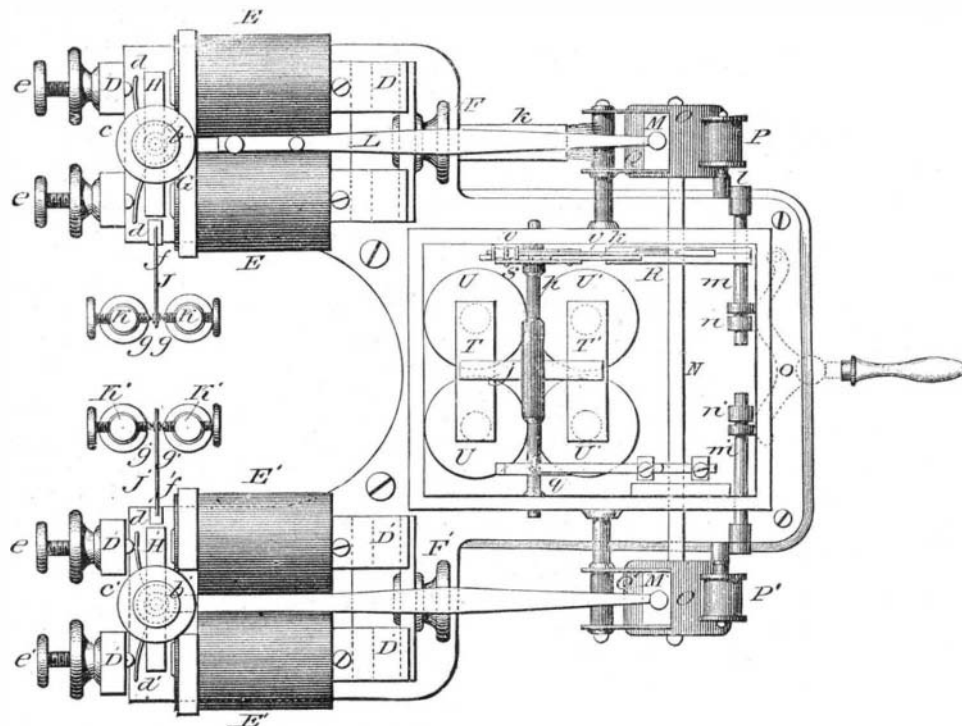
PLAN VIEW SHOWING ARRANGEMENT OF PARTS.
